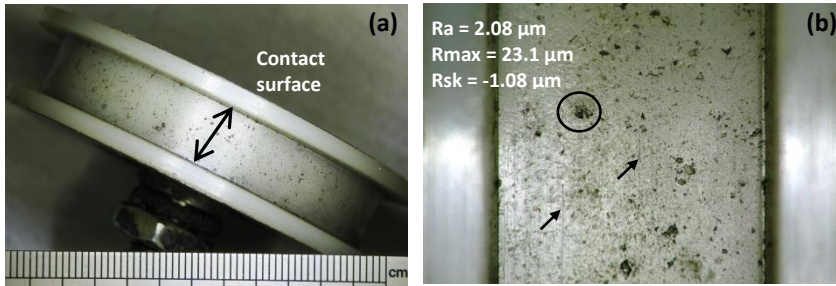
Photomicrograph of the polymer roller (a) contact surface (b) exploded view
